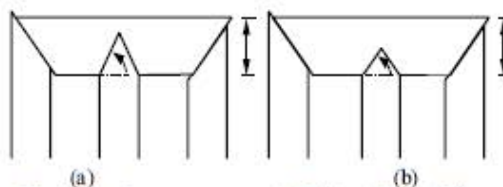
Transformer core type (a) T-joint 60° , and (b) T-joint 45° .
